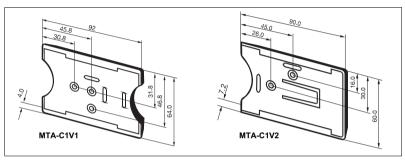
Card holder MTA-C1V1 and MTA-C1V2
